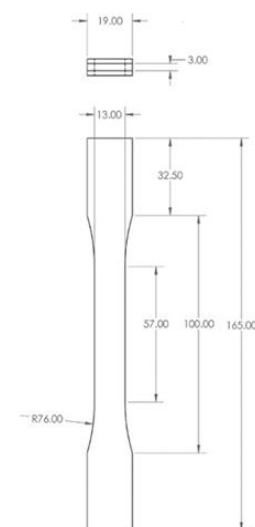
Engineering drawing of tensile test specimen (ANSI)
